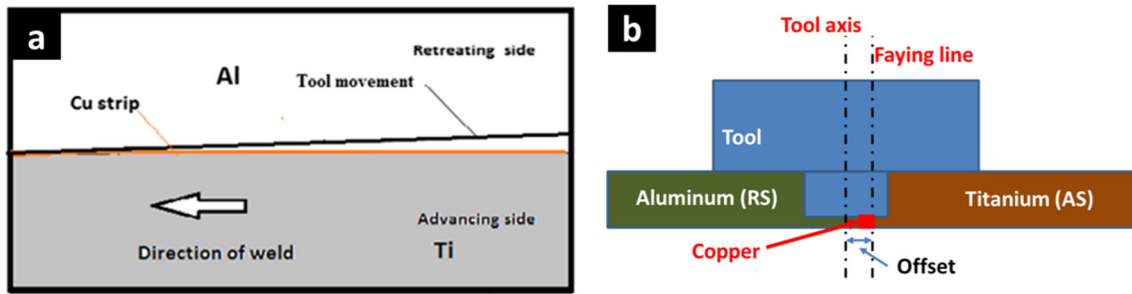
Schematic diagram of experimental set-up from top side (a) and cross section (b) of the weld. Ti and Al are clamped in advancing and retreating side of the tool, respectively. Tool offset position changes from 2.5 to 1.0 mm towards Al side from the faying interface
